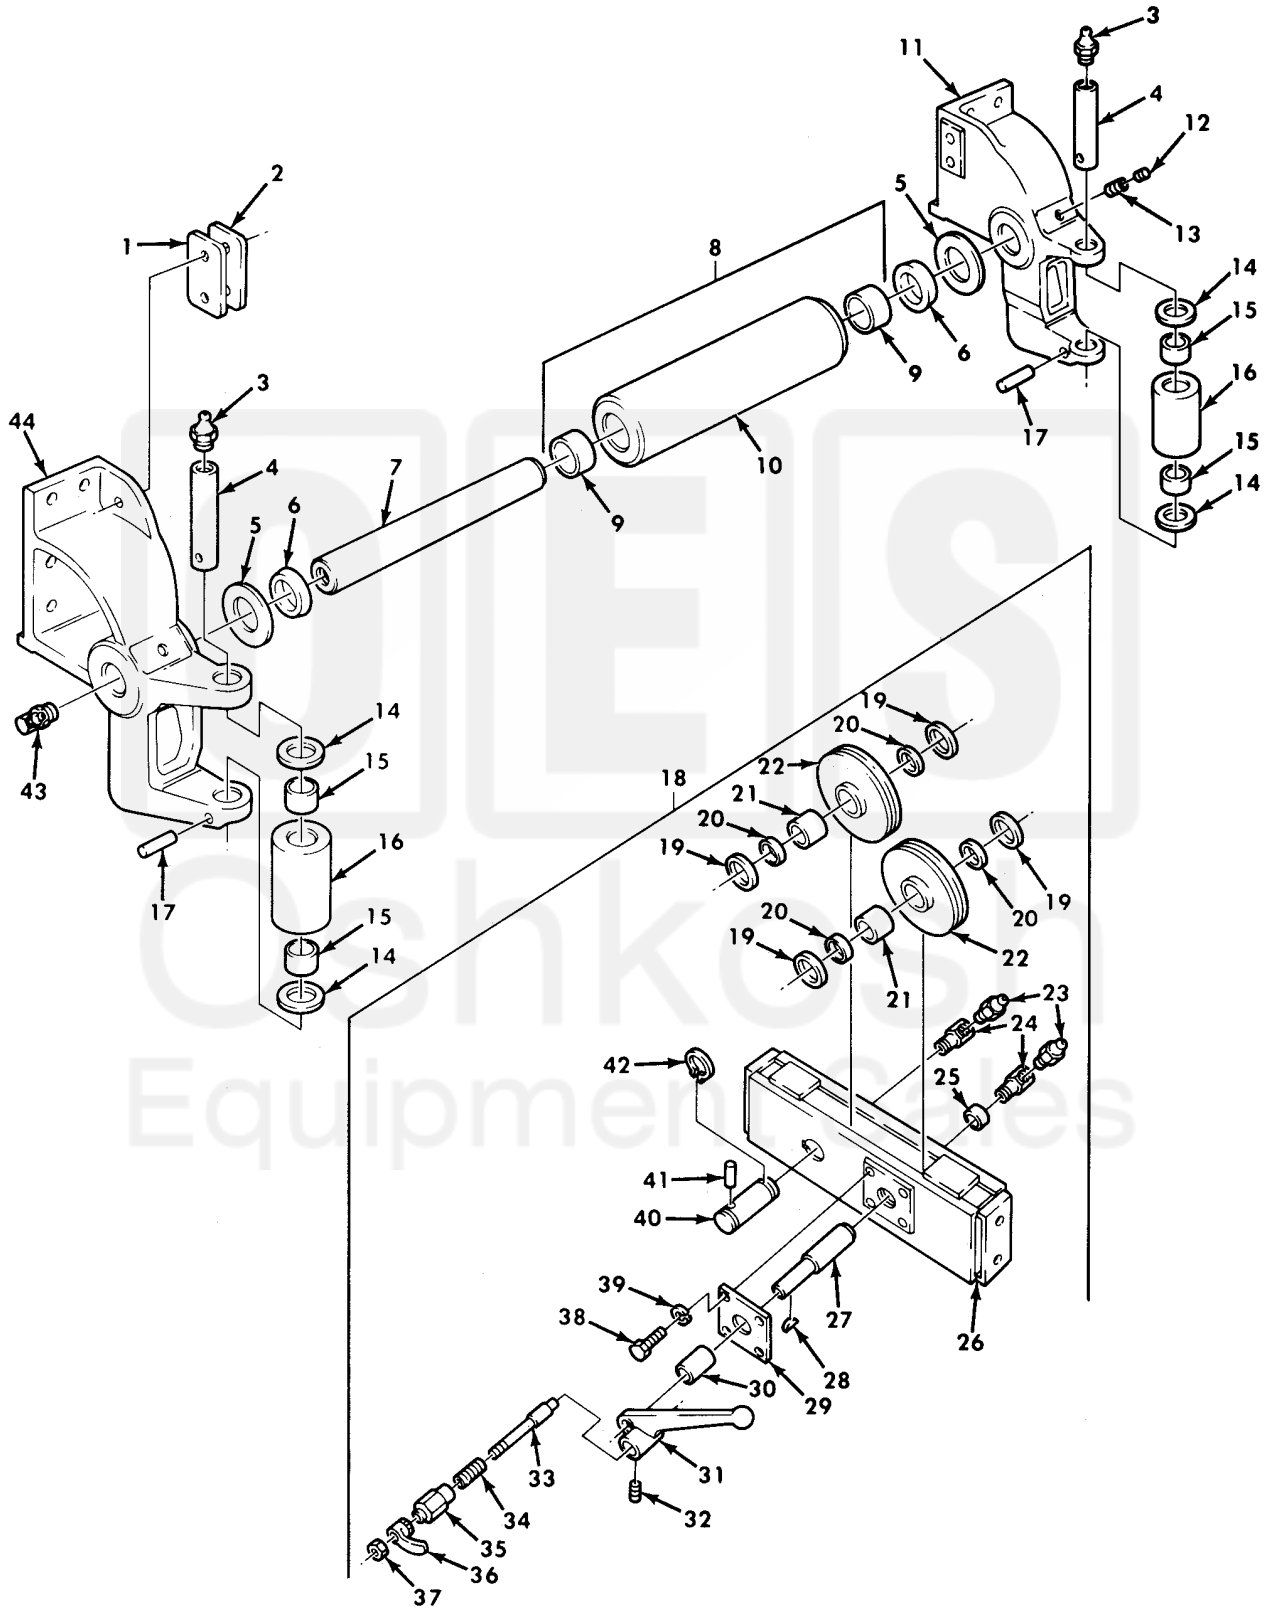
Front Winch Tensioner Assembly, Roller Assembly, and Related Parts.
